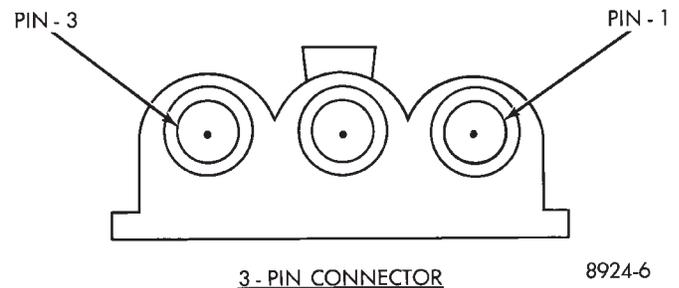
Fin-sensing Cycling Clutch Switch Harness Connector
